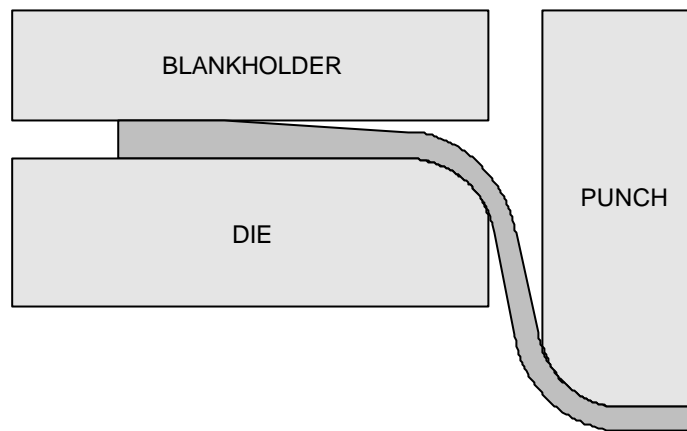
Thickening of the flange during deep drawing causes the blankholder force to concentrate on the outer part.
